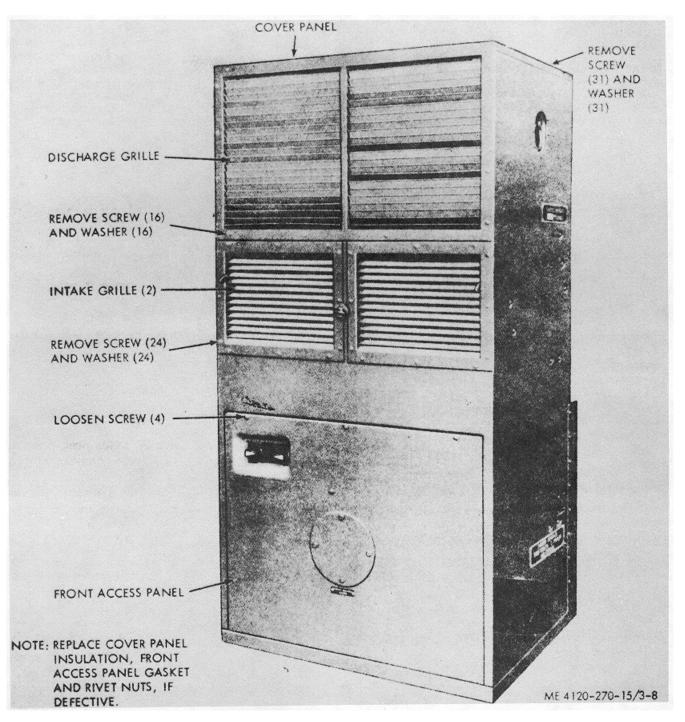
Cover panel, discharge grille, intake grille and front access panel, removal and installation
